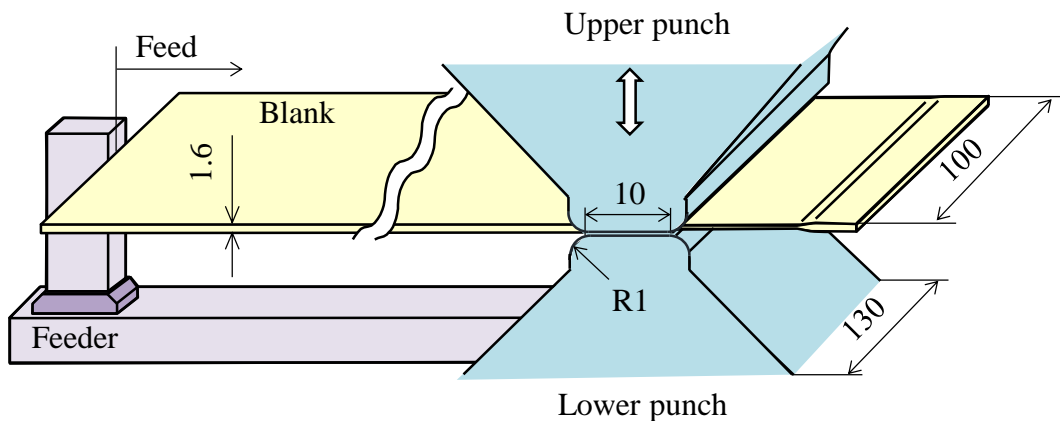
Tools and dimensions for successive forging of tailored blank.
